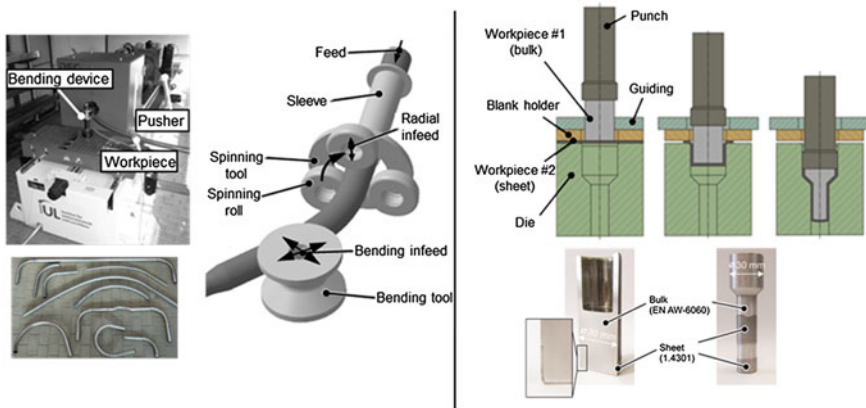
Other combinations of forming processes: extrusion and spinning (*left*), deep drawing and cold forging (*right*)
